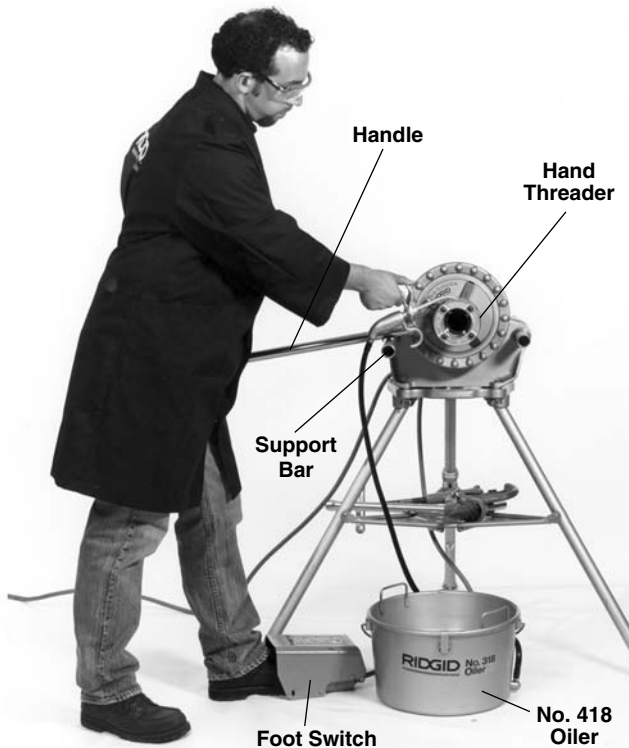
Pushing Hand Threader onto Pipe to Engage Dies
